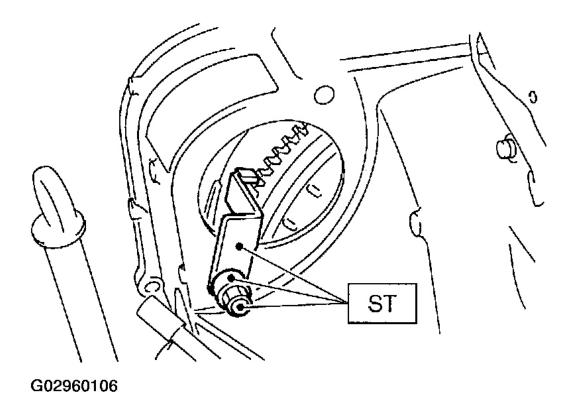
Installing ST To Torque Converter Clutch Case Courtesy of SUBARU OF AMERICA, INC.
